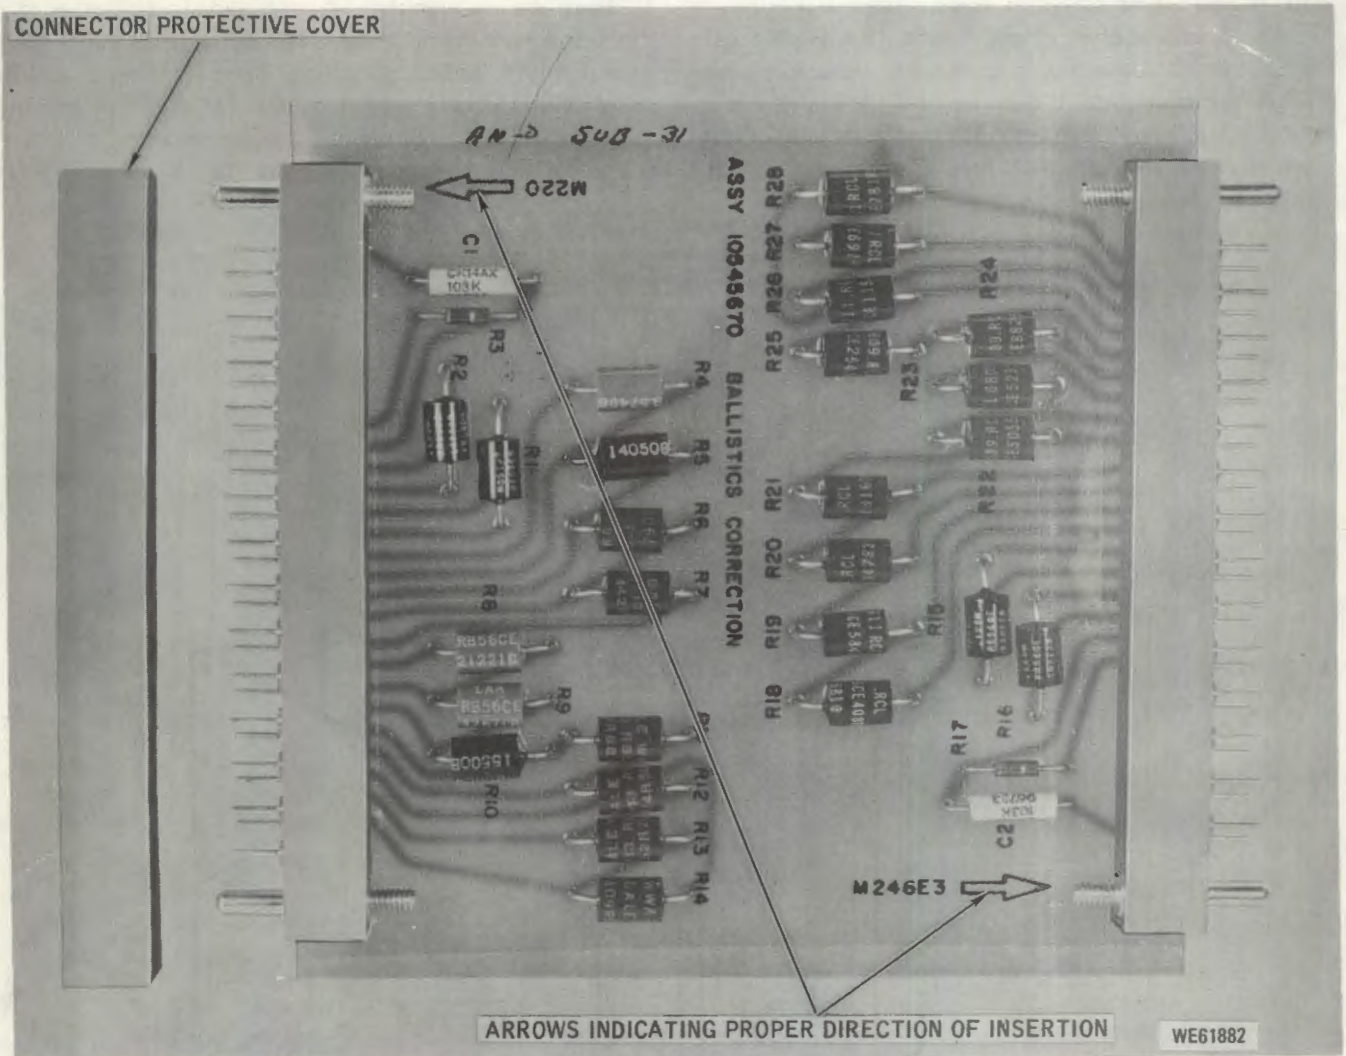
Dual section ballistics correction circuit card assembly A21A12.
